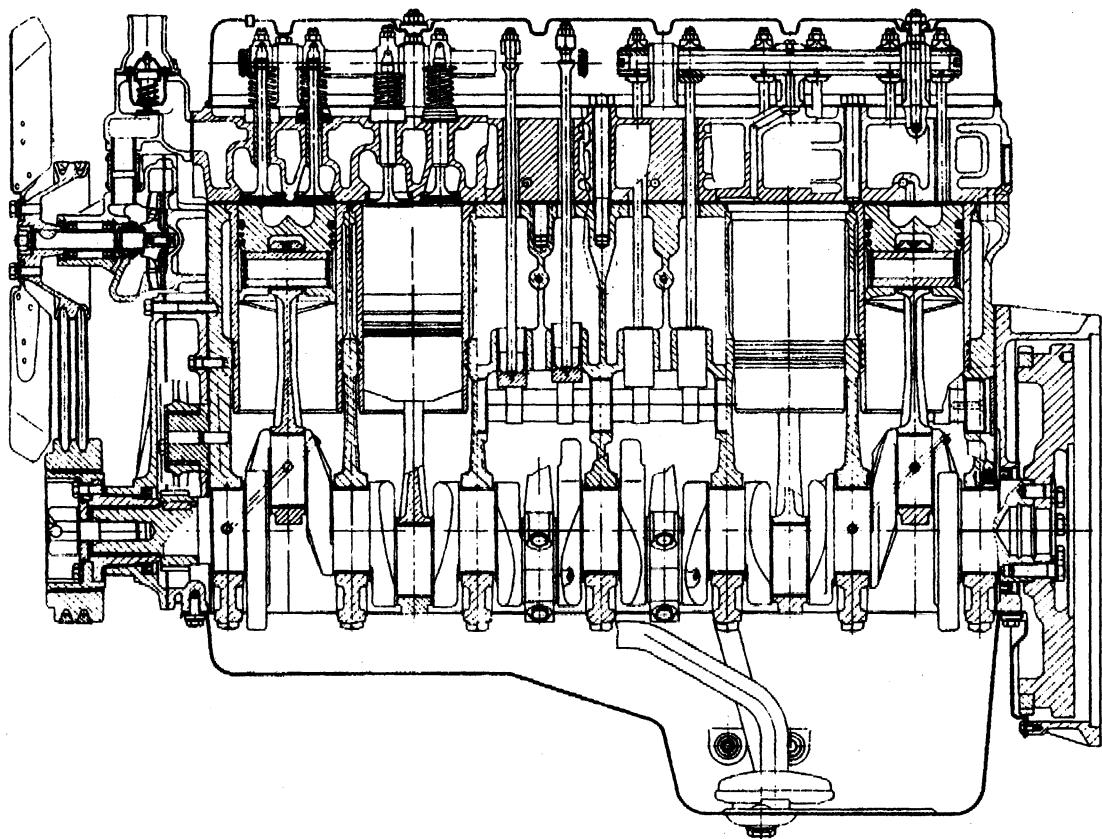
longitudinal sectional drawing for R6100, R6105 diesel engine
